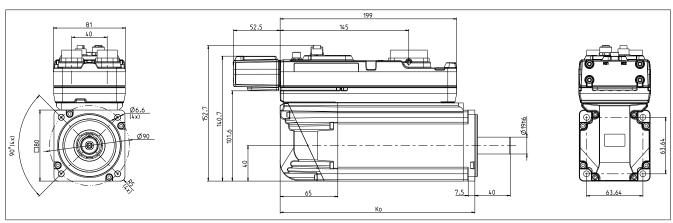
8ZDFB5000000.000-0 - Dimensions
